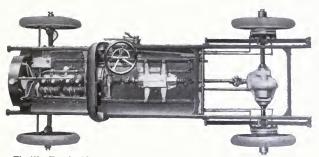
Chassis of Studebaker Model L Car, Showing Direct or Shaft Drive, with Two Universal Joints. Studebaker Bros. Mfg. Co., South Bend, Ind.
